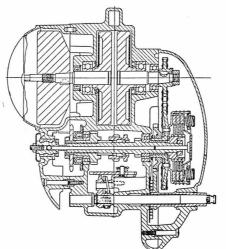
Cross sectional view of engine and transmission assembly.
